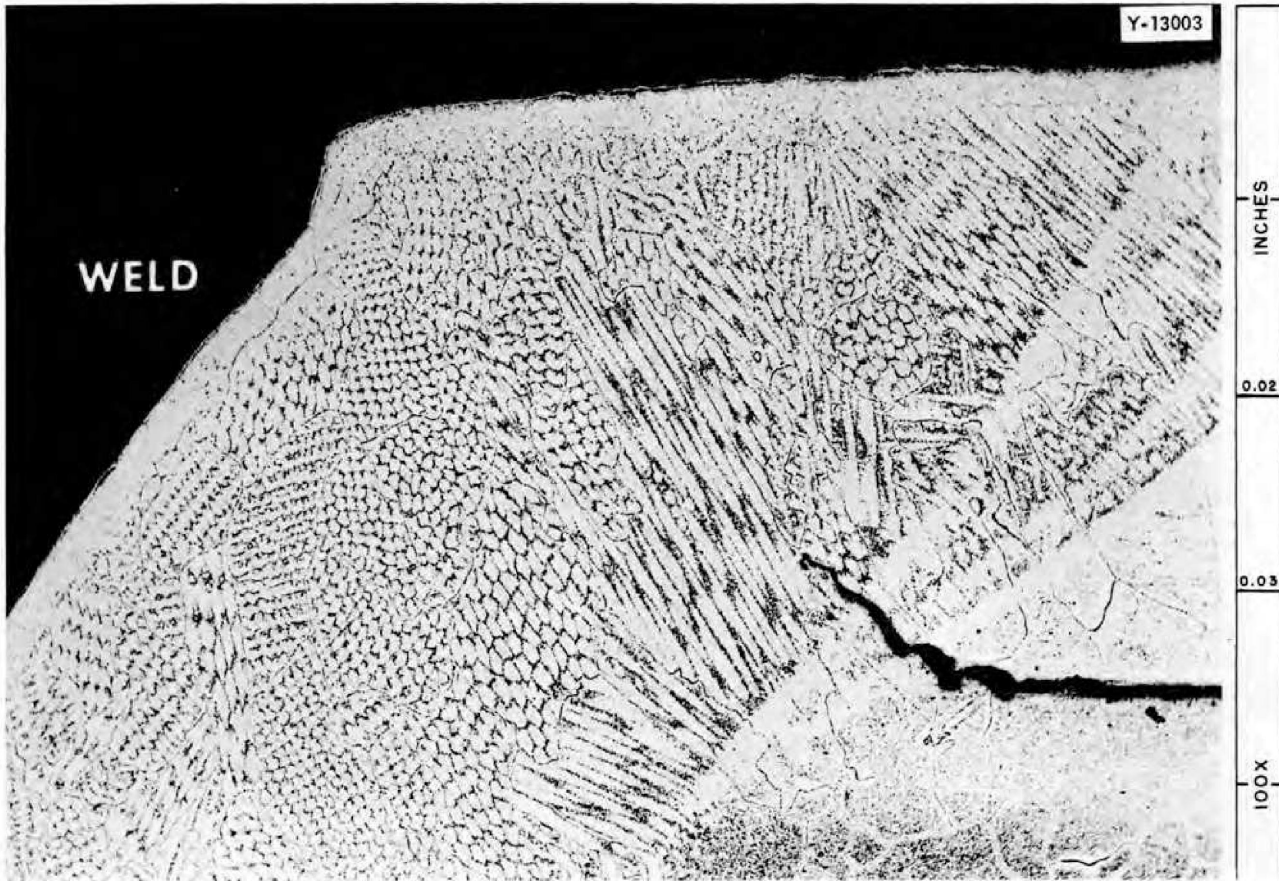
Tube-to-Header Weld Exhibiting Crack in Early Stages of Propagation. Etch: electrolytic; oxalic acid.
